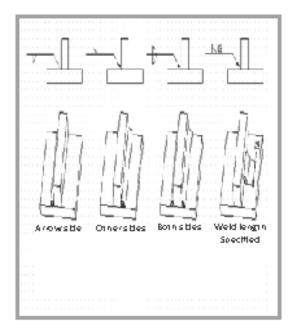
Basic Weld Symbols
